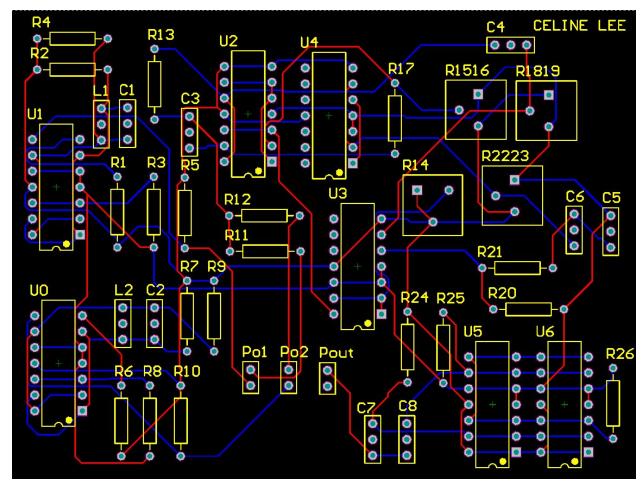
Altium PCB board layout, with components labelled correspondingly to PCB schematic.
